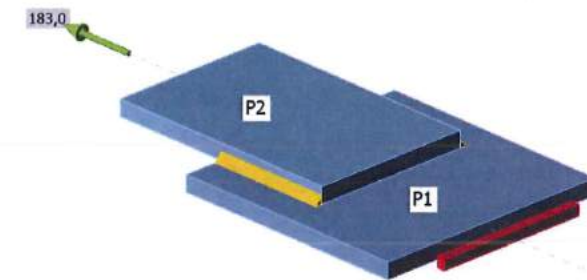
Benchmark example for the welded lap joint with parallel fillet welds
